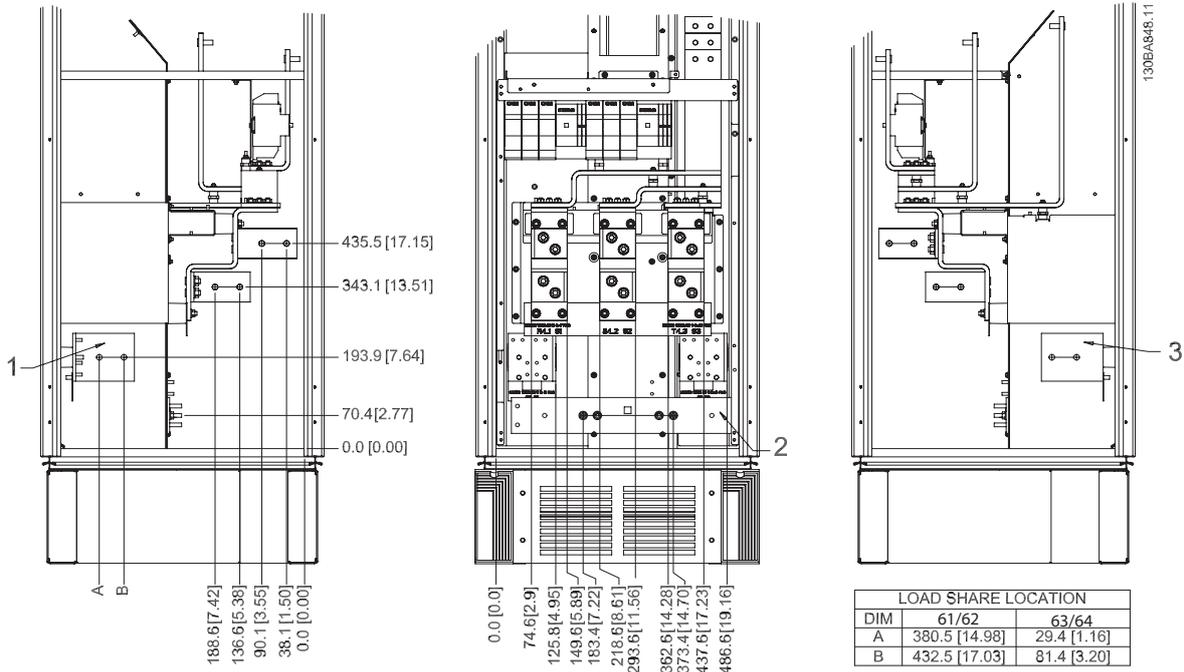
Terminal locations - Rectifier (Left side, front and right side view). The gland plate is 42 mm below .0 level.
